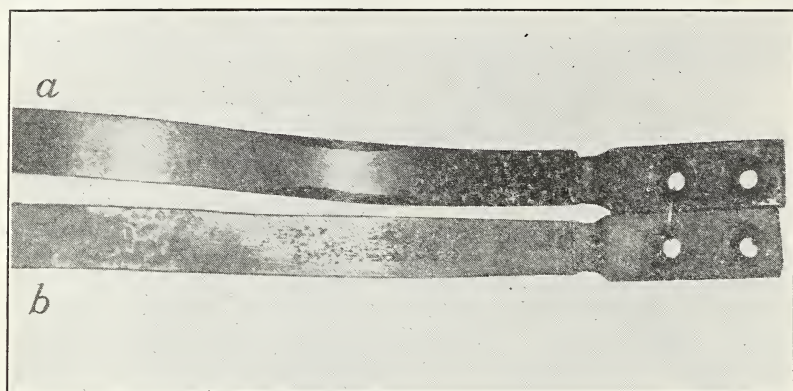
Ribs repaired by welding new metal upon worn places, and then grinding to factory dimensions with mechanical gages and accurate fixtures: *a*, Rib built up and ground; *b*, plated and finished rib.
